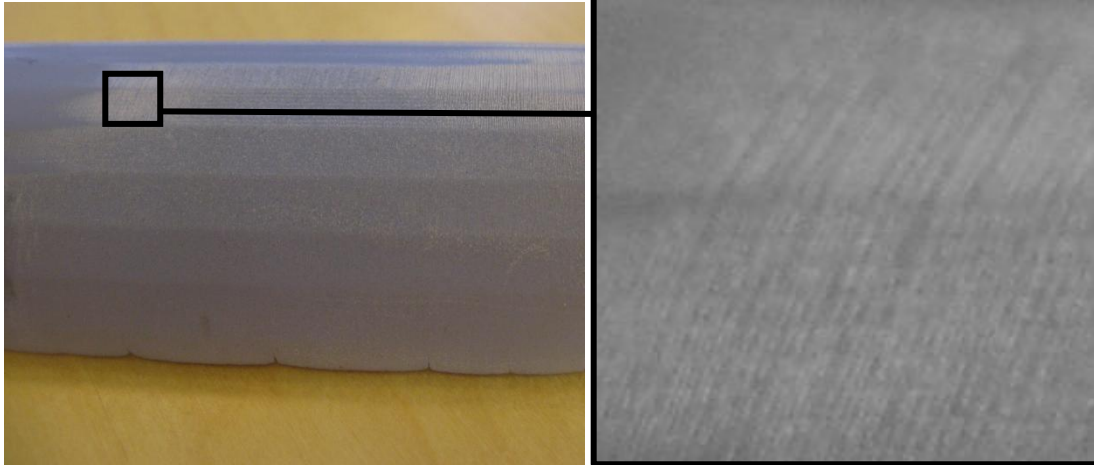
Surface texture of rapid prototyping on a test print: original surface (left) and surface treated with sand paper to visualize the printing lines (right)
